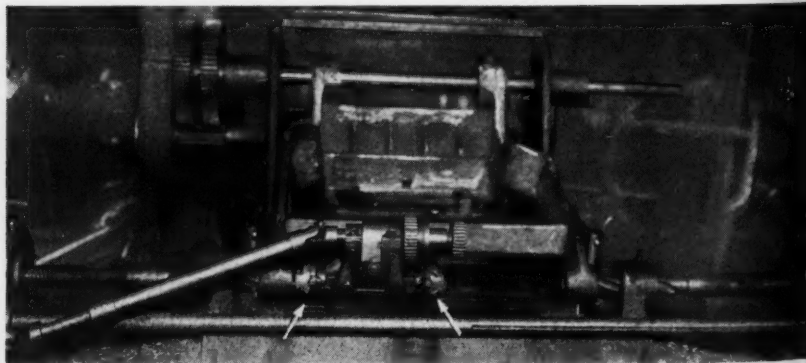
Boring the shaft holes in the bed for a 12×18 -in. Gordon press.
